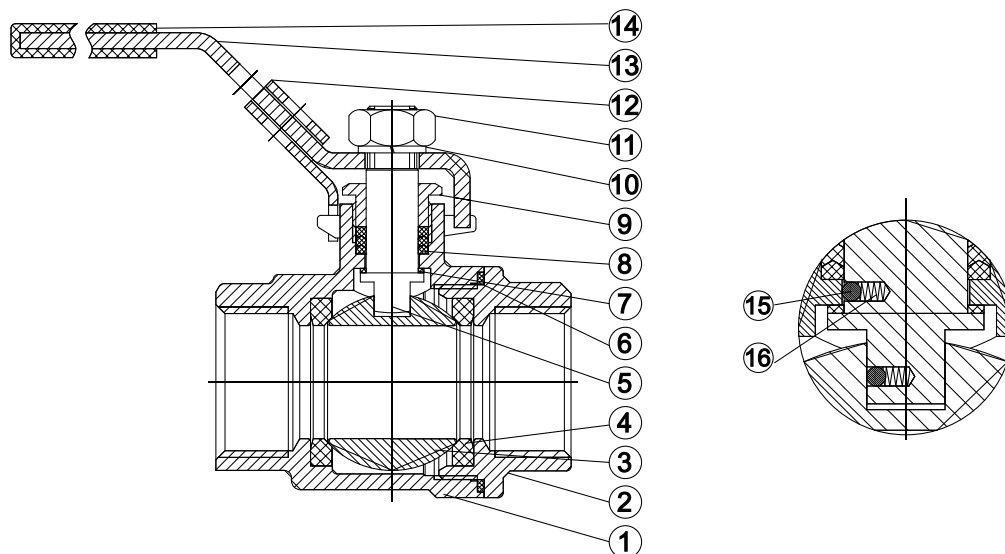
Sectional drawings of ECOLINE BLC-P2
